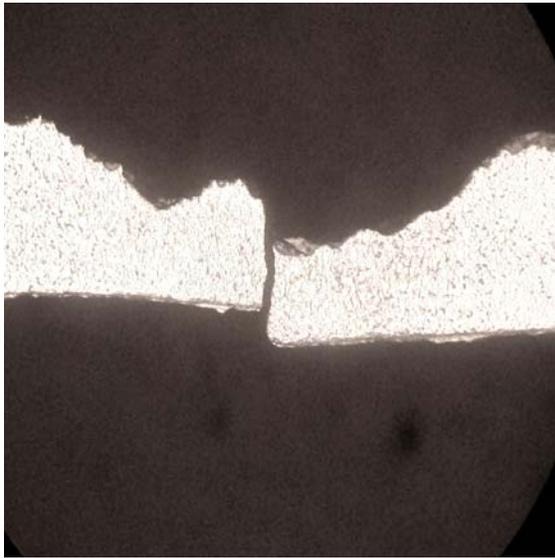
Oxidized Aluminized Steel I.D. Tube Weld Cross-section
